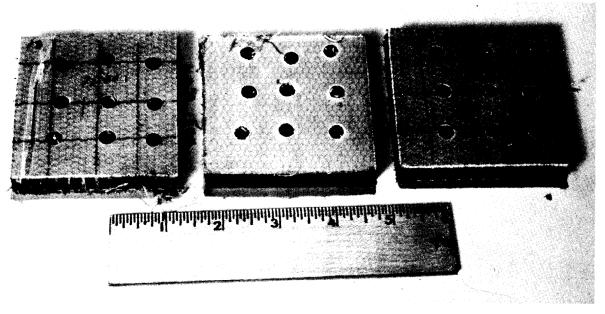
DRILL: .250 SPADE DRILL
